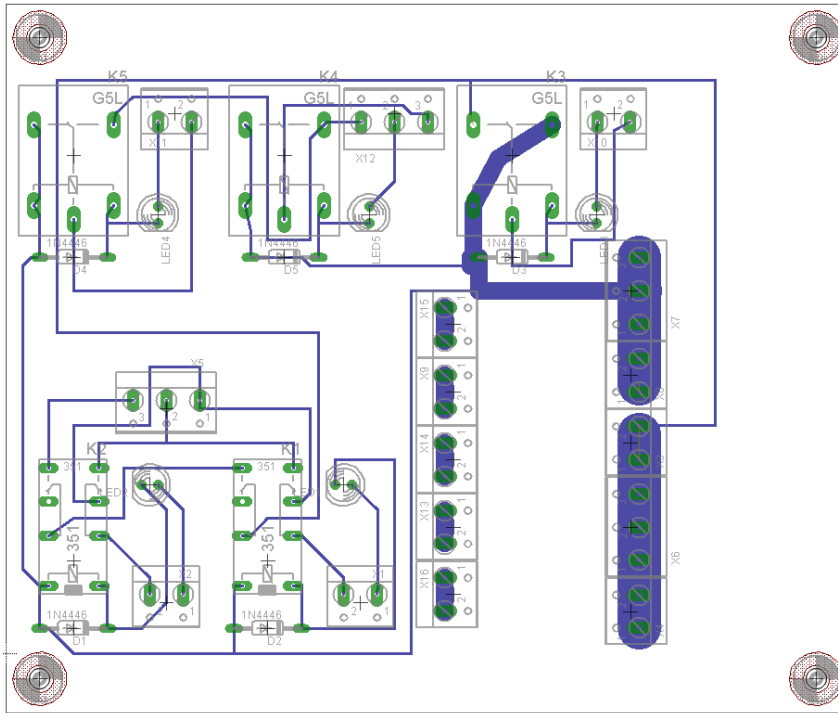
12V Distribution and Relay PCB Bottom Layer
